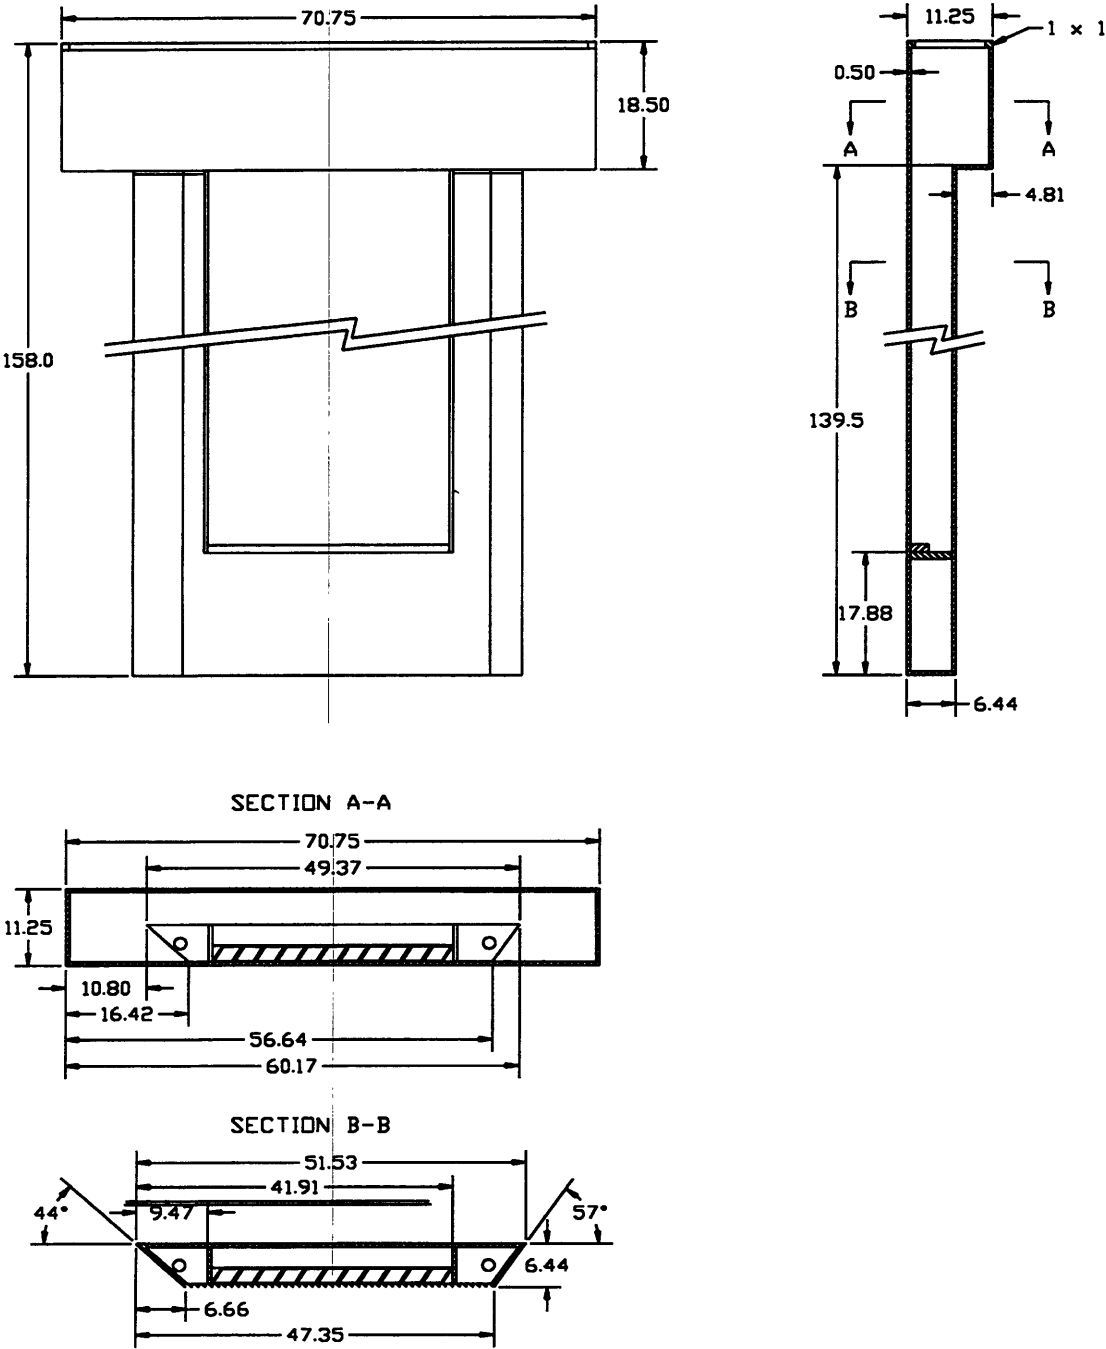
Fission Converter Tank Front, Side and Two Cross Sectional Views (All Dimensions are in Inches)
